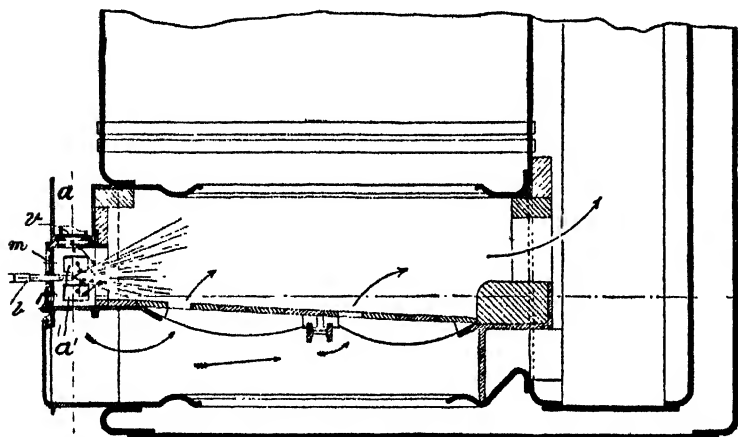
Furnace of marine boiler arranged for oil-firing under forced draught.
